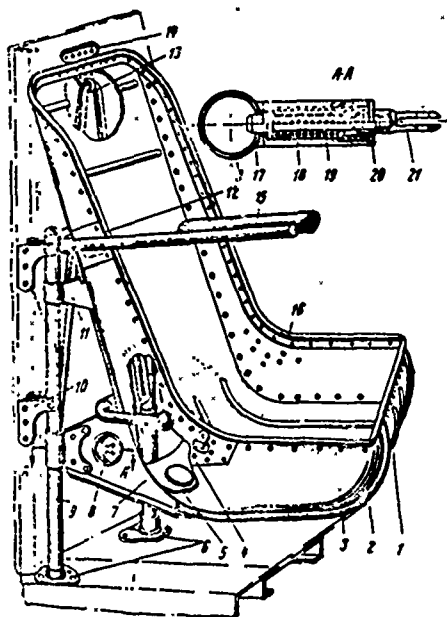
Pilot's seat: 1 -- wall of seat; 2 -- seat contour; 3 -- side wall; 4 -- attachment bracket for seat belts; 5 -- connecting knee; 6 -- guide support; 7 -- bottom bracket; 8 -- locking mechanism handle; 9 -- guide; 10 -- guide attachment brackets; 11 -- upper bracket; 12 -- elbow-rest rack; 13 -- shock cord; 14 -- shock absorber hook; 15 -- elbow-rest; 16 -- edging section; 17 -- locking mechanism pintle; 18 -- cylinder of mechanism; 19 -- spring of mechanism; 20 -- guiding nut; 21 -- fork.
